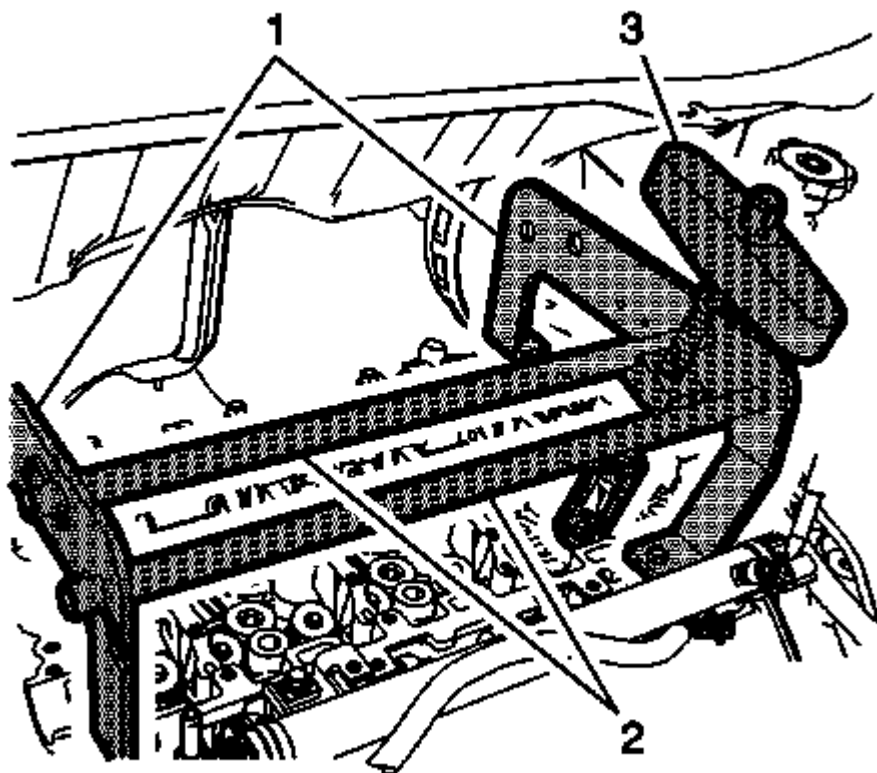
View Of Valve Spring Compressor Adaptor Set
